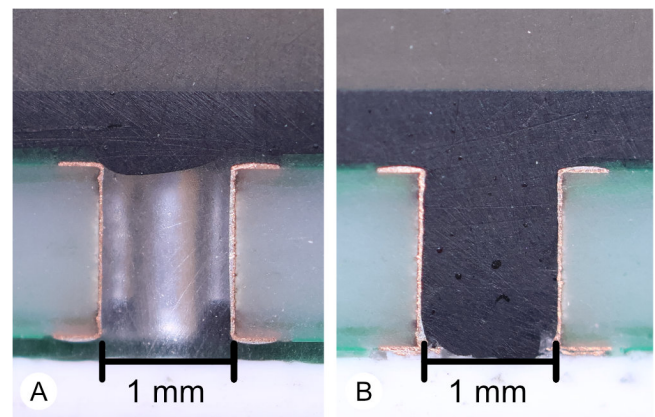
Cross-sections of the plated-through holes of a test PCB cast in resin, sanded and polished. (A) Conductive filament is printed onto the PCB surface without Prinjection; it lies on the surface making little contact with metal. (B) Prinjection leaves holes fully filled and ensures reliable connectivity.
